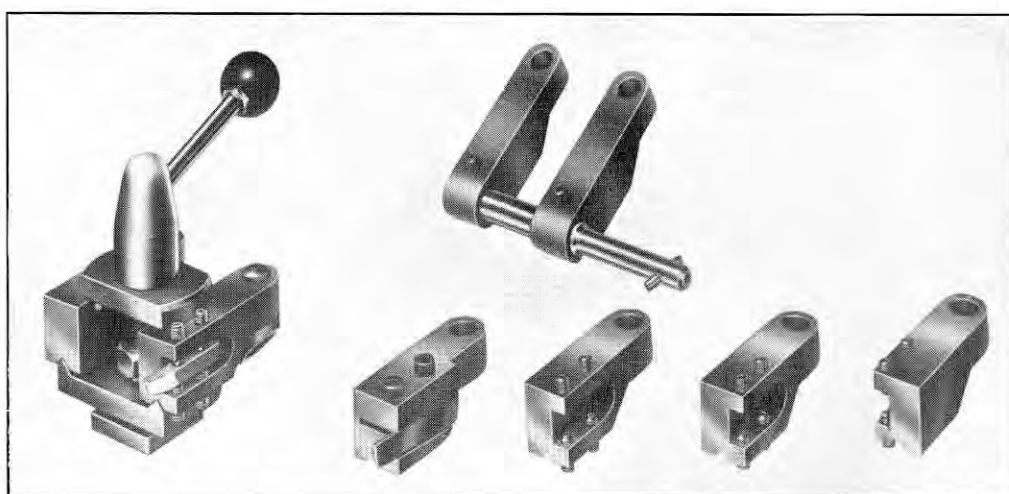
TOOL POST WITH INTERCHANGEABLE HOLDERS; F. BURNERD & CO., LTD.
